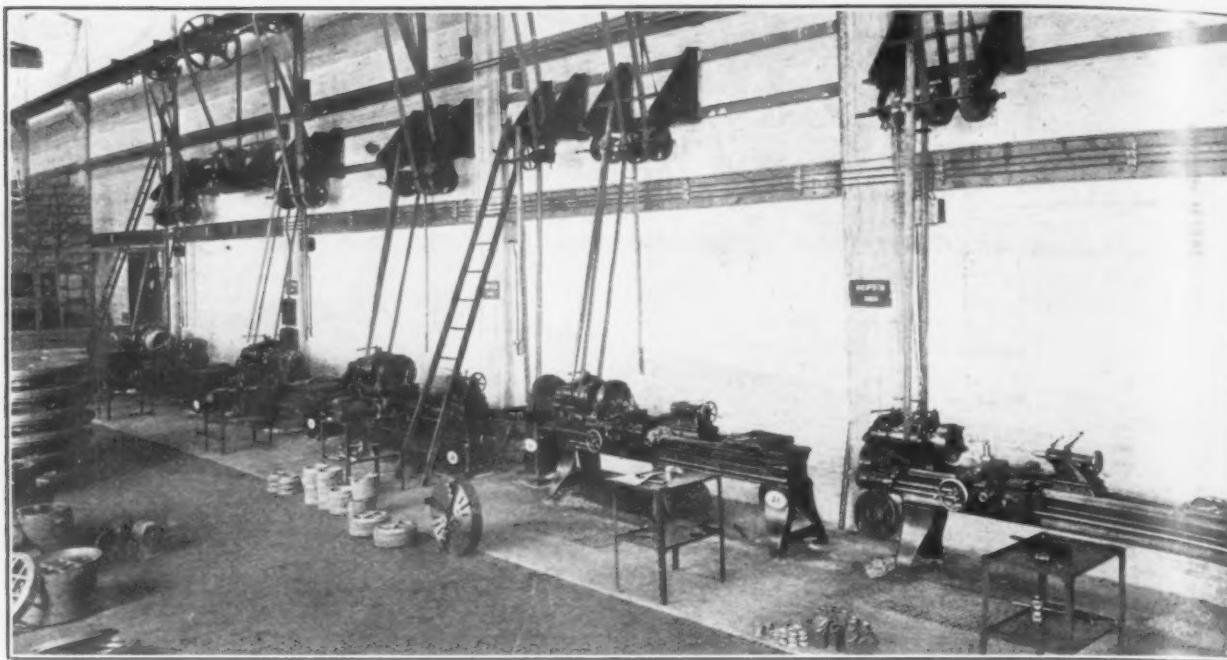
Lathe Department. Shows the group drive employed for small machine tools and also illustrates the method of securing counter and main line shafting to walls of building
